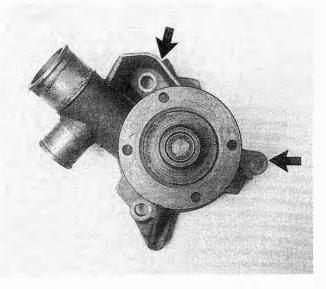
Locations of coolant pump mounting bolts (arrows) which must be removed first.
